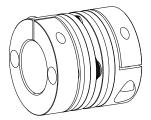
RADEX[®]-NC HT type EK (example: hub type 2.5)
